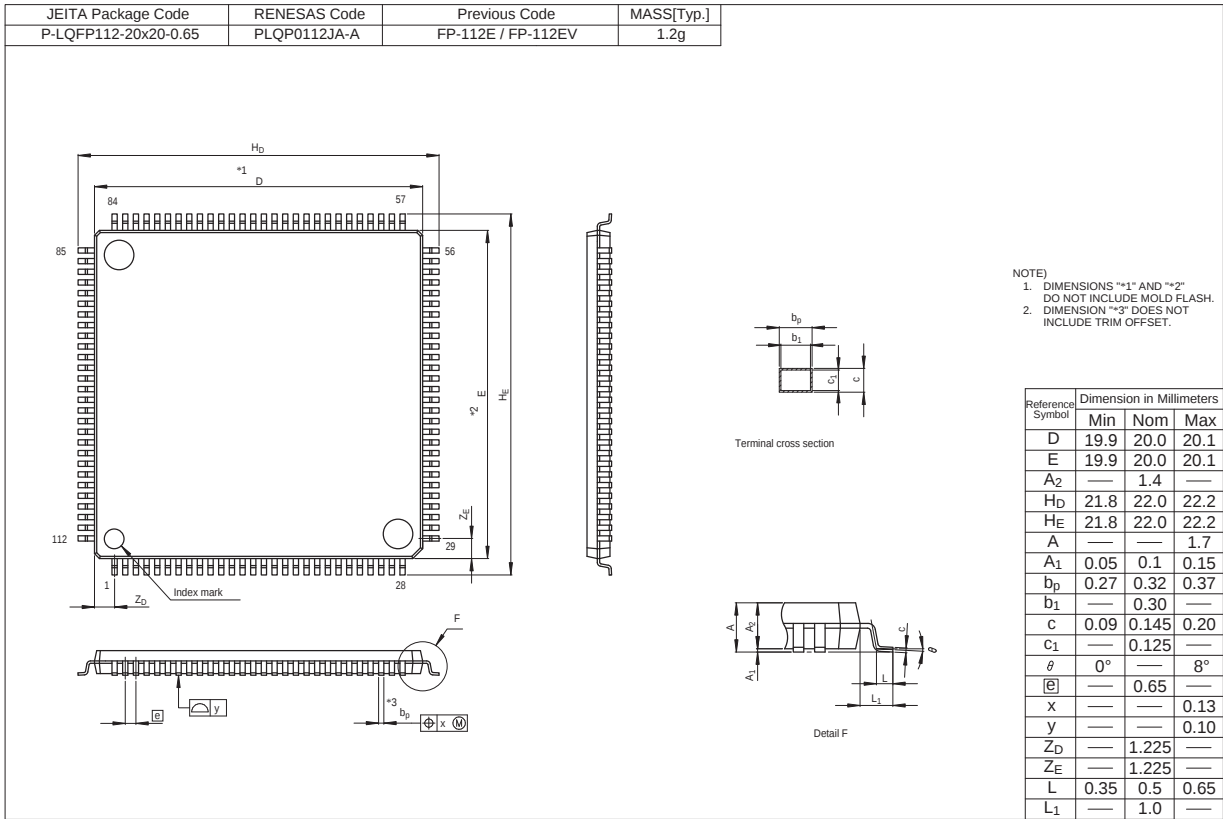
Pin LQFP (PLQP0112JA-A) Package Dimensions
